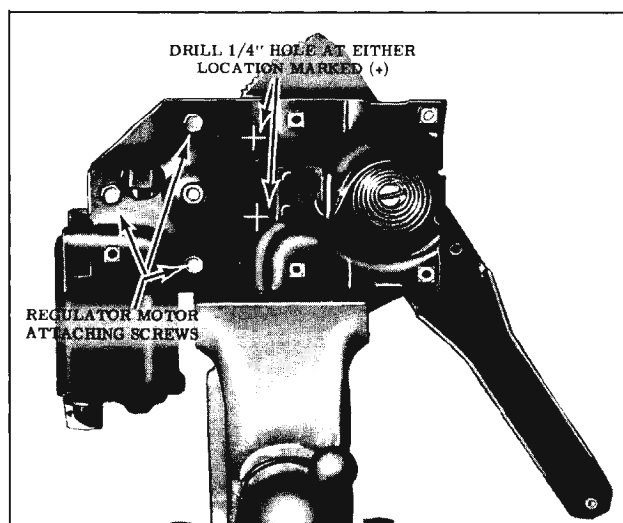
Electric Window Regulator (17 & 47 Styles)
